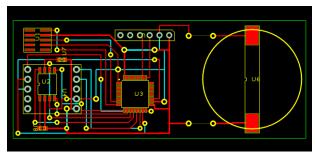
IMU PCB Layout. This is the design for the IMU board. To get an idea of scale, the circular piece is 0.9" in diameter
